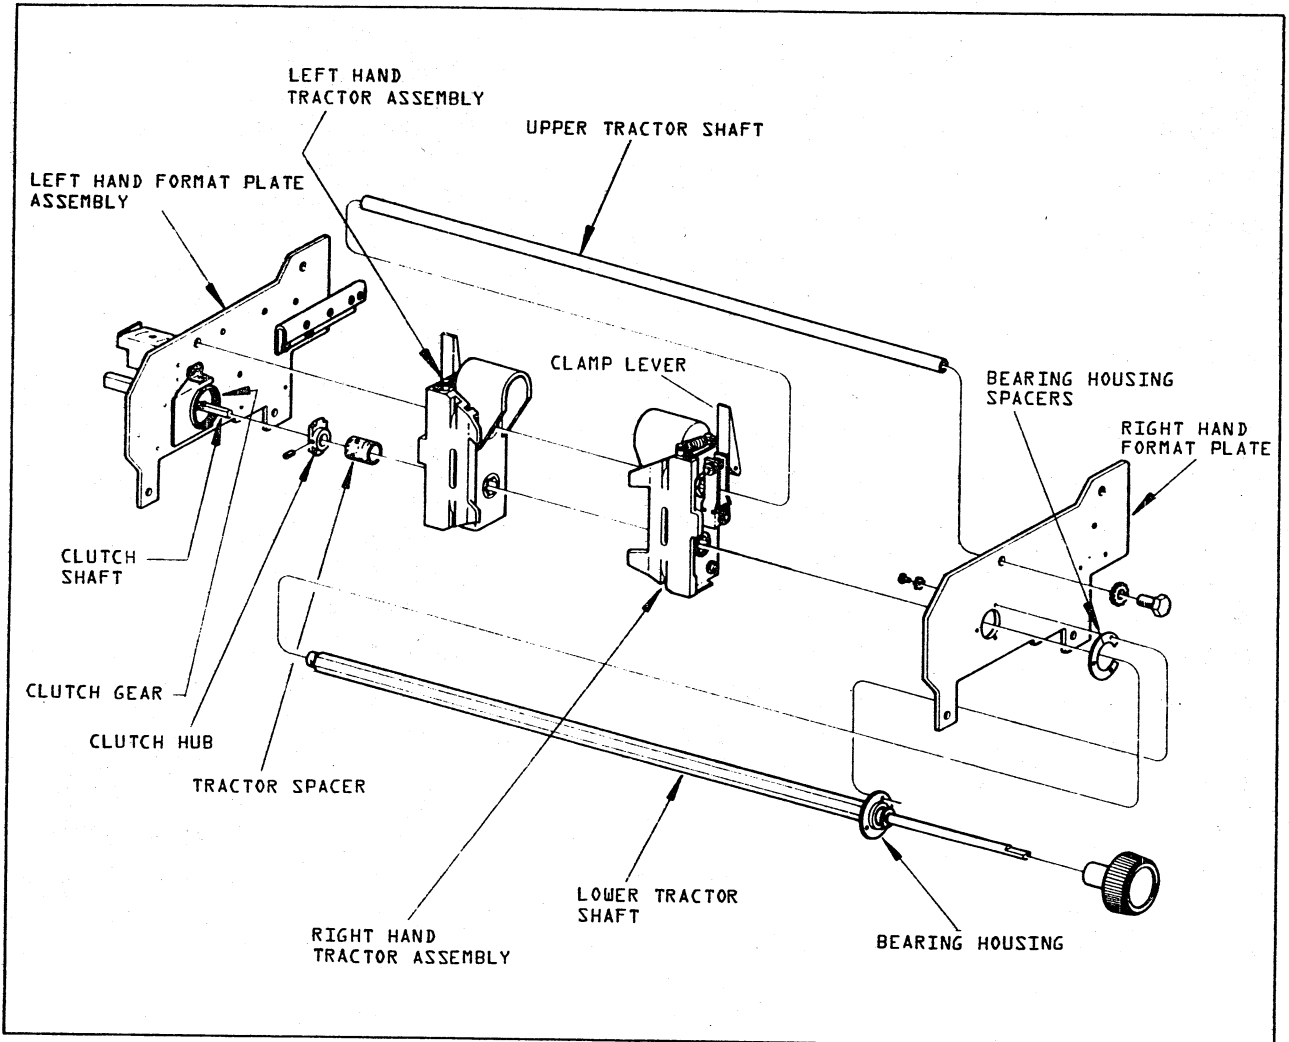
TRACTOR ASSEMBLY REPLACEMENT
